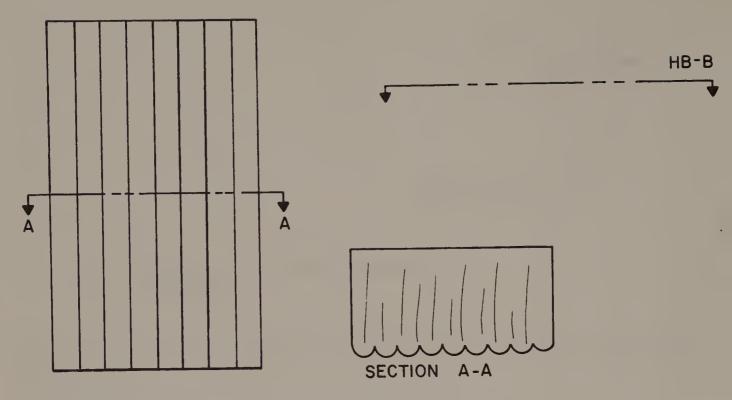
A cutting plane is drawn through an area to be sectioned.
